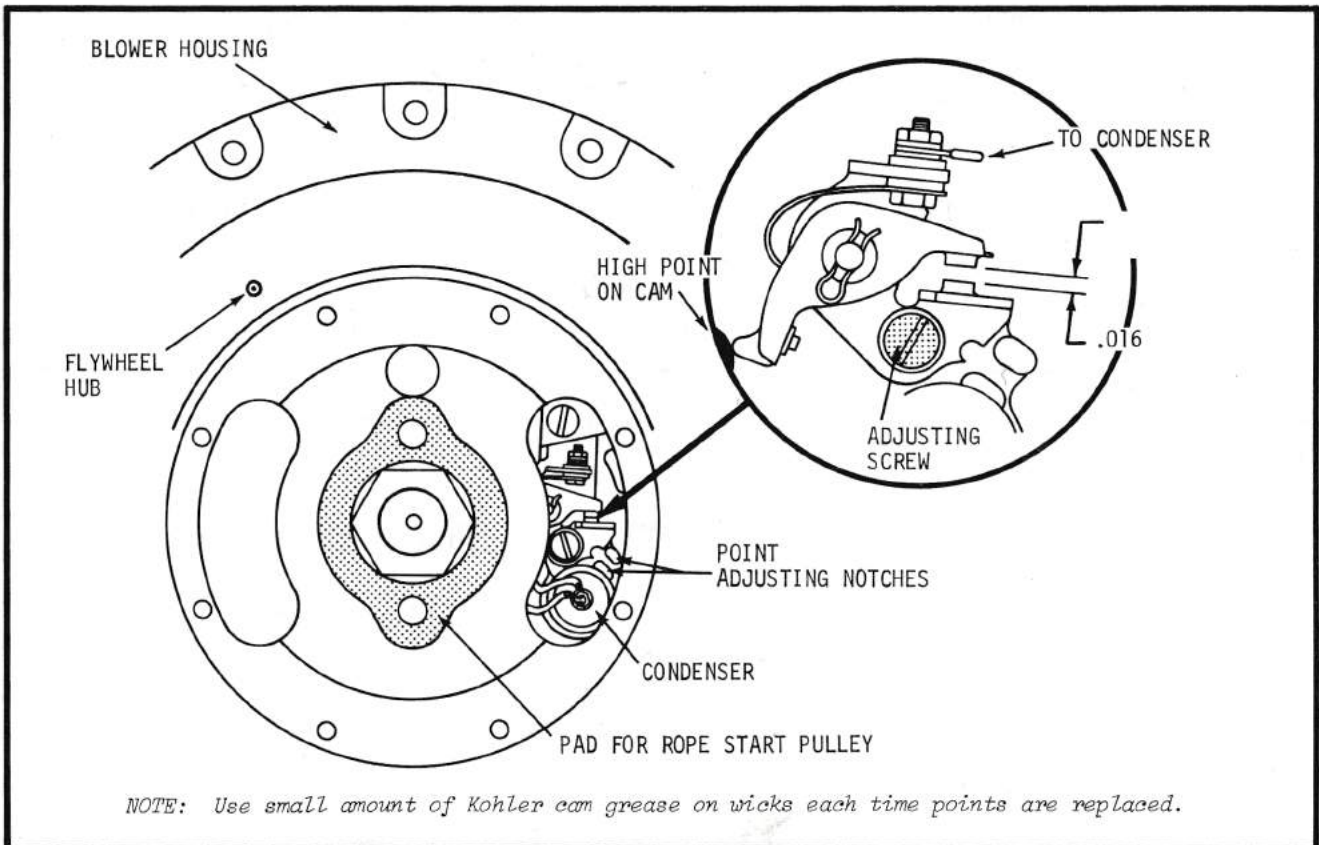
BREAKER POINT LOCATION AND ADJUSTMENT DETAILS
